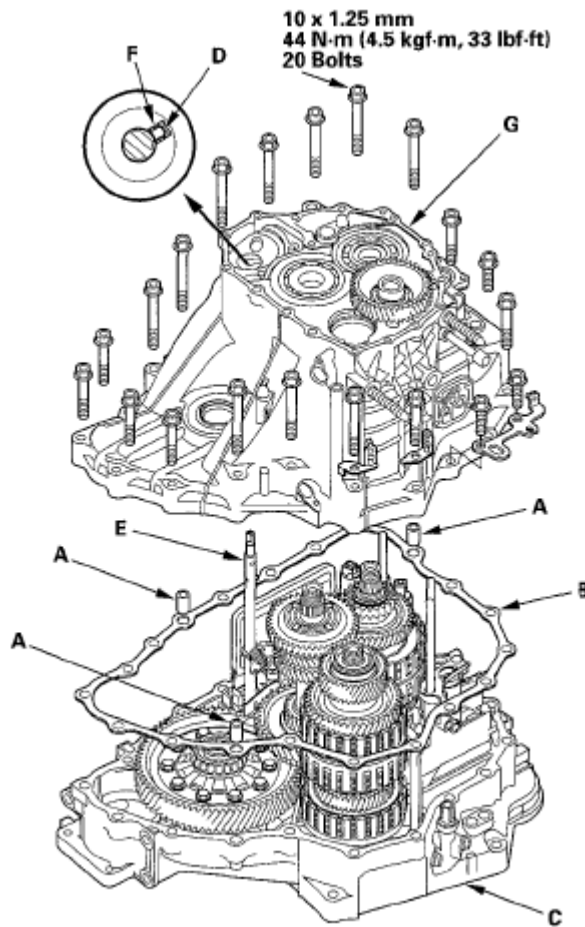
Identifying Shift Fork Shaft, Large Chamfered Hole And Lock Washer With Torque Specification
